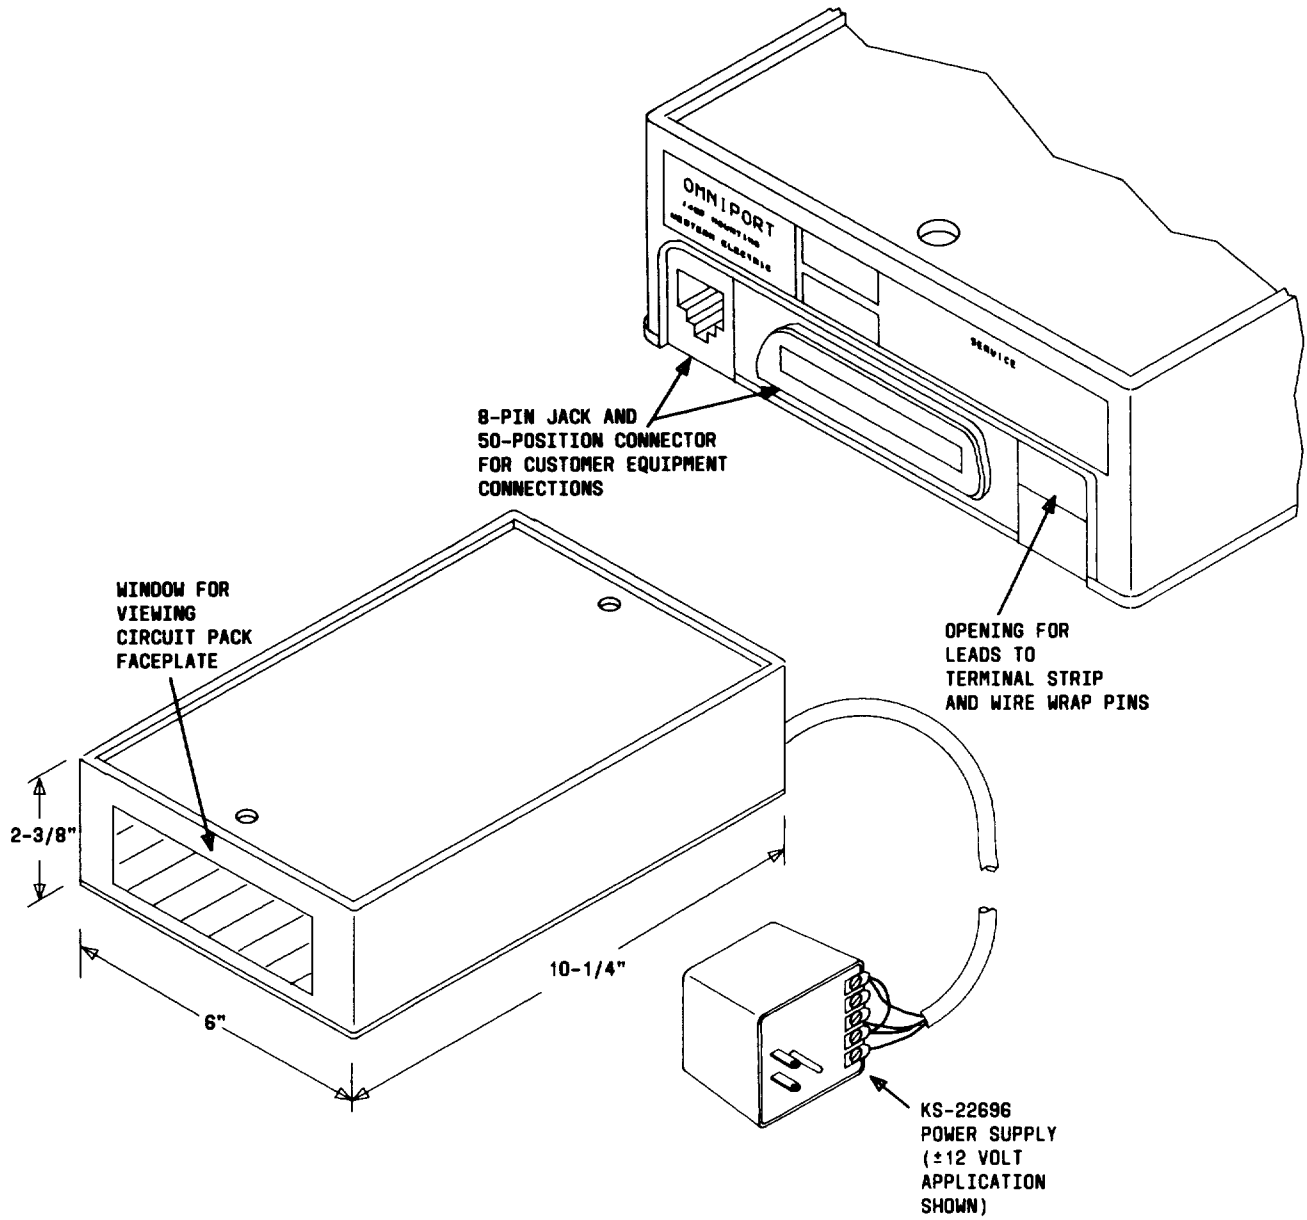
146B Mounting and KS-22696 Power Supply (±12 Volt Application Shown)
